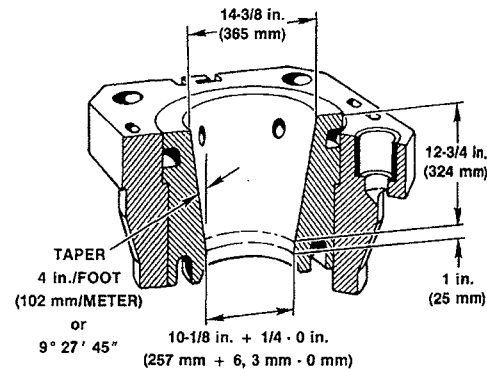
API Standard Slid Pin Drive Master Bushing Dimensions
